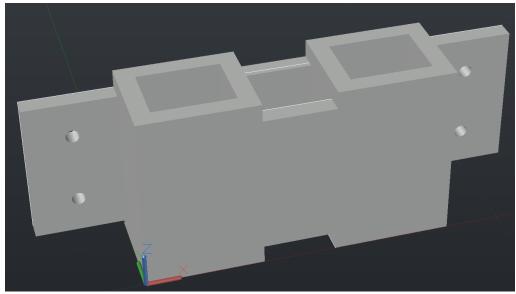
3D Design of the Prototype 2 of the Shaft Mechanism
